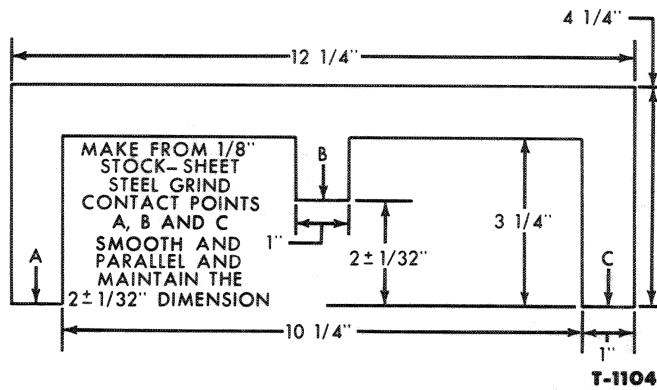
Diagram for Fabricating Clutch Finger Height Tool
